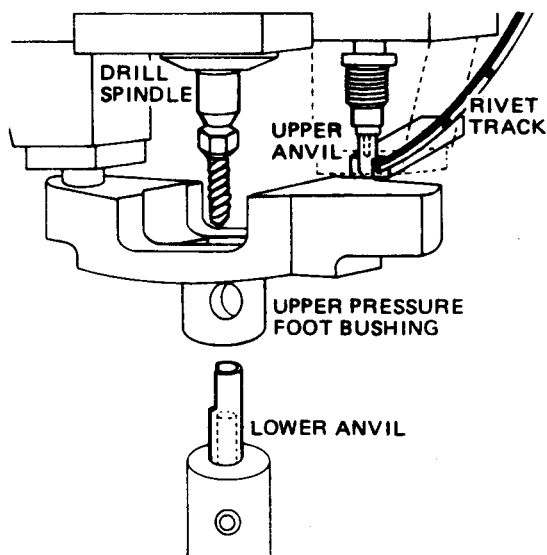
BASIC DRIVMATIC TOOLING COMPONENTS
